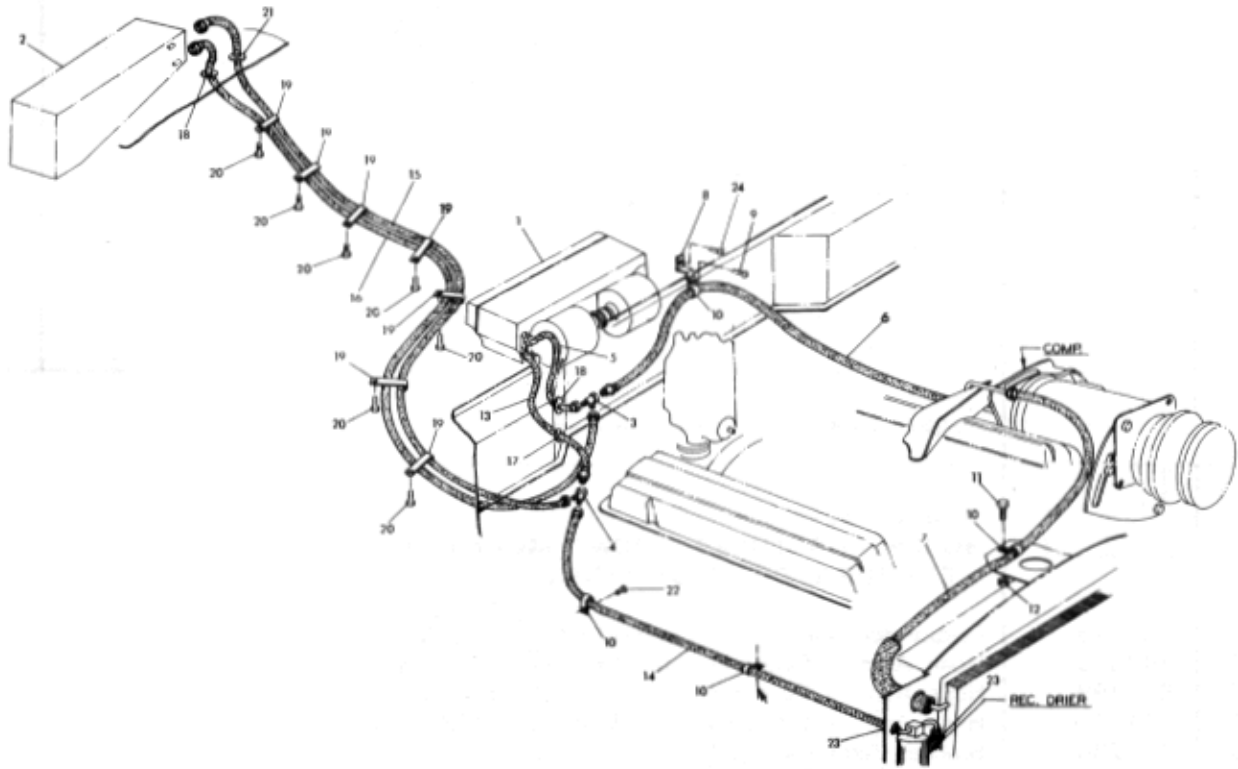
Hoses and Tubes, Front Mounted Condenser and Evaporator, 8 Cylinder
